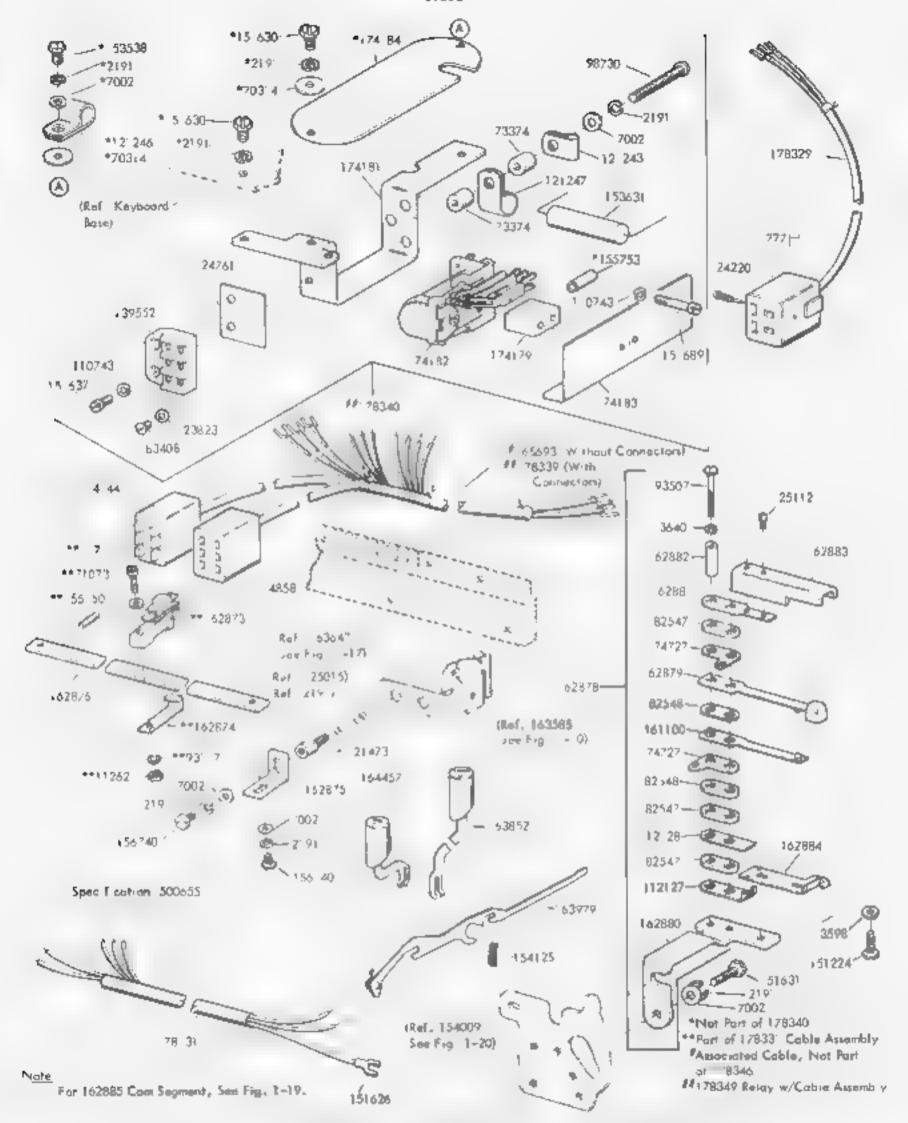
178346 MODIFICATION KIT TO EQUIP KEYBOARD WITH ANSWER-BACK CONTROL
